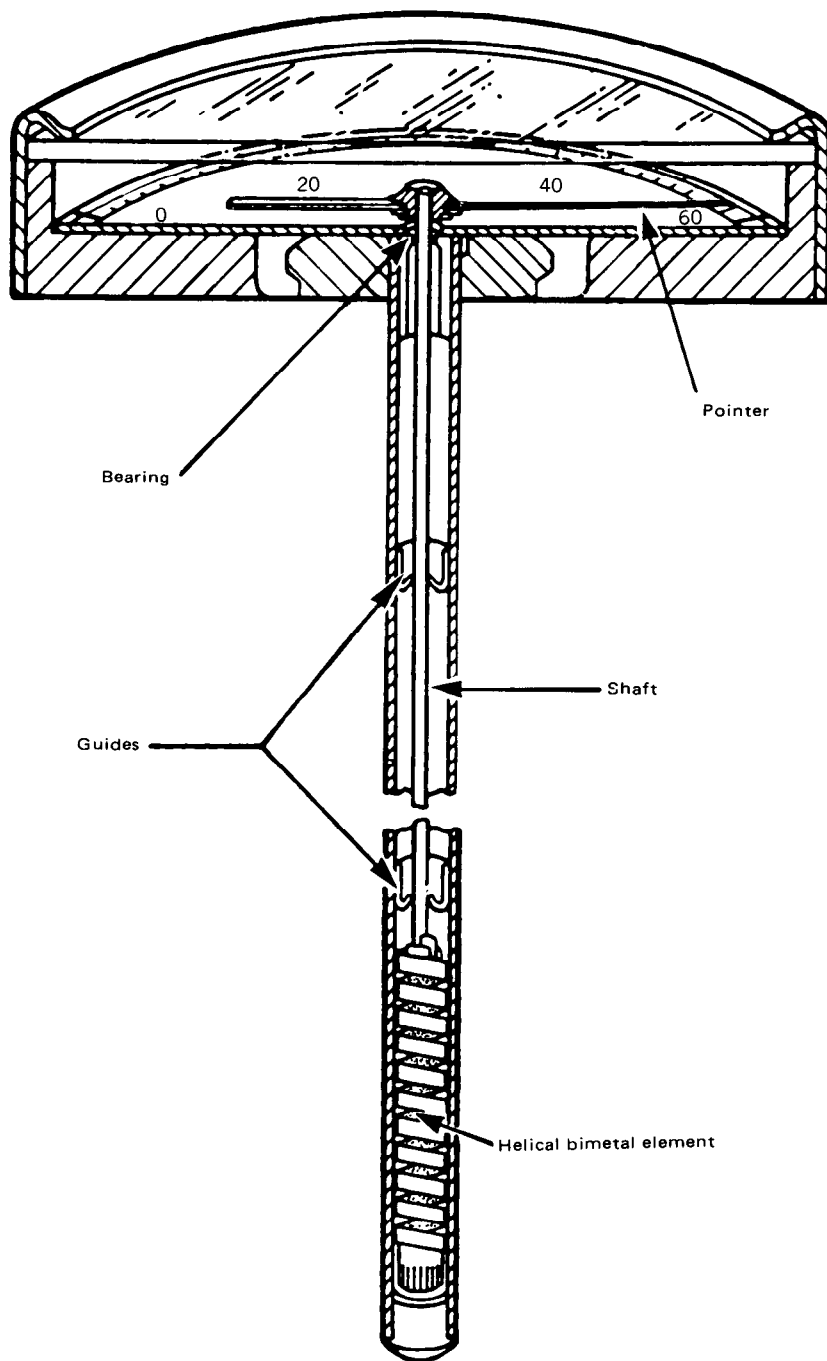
Sectional view of thermometer with helical-type bimetal element.
